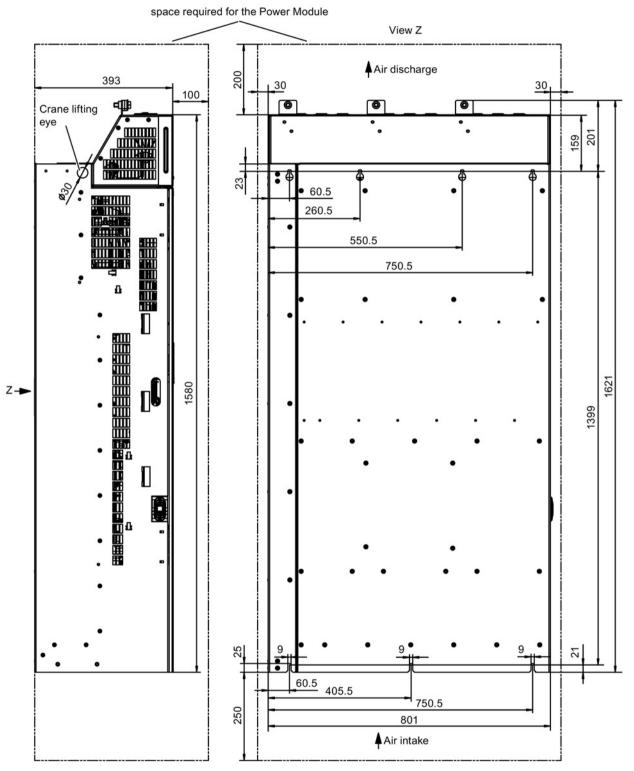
Dimension drawing of PM330 frame size JX, view from the side, view from the rear
